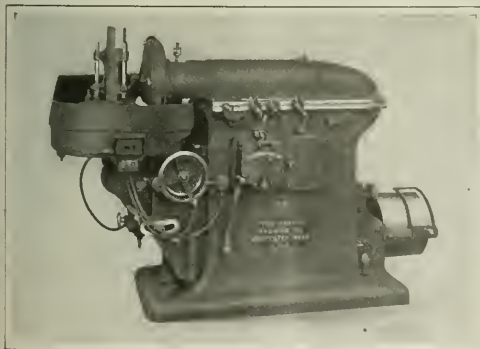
Automatic Surface Grinding Machine developed by the Heald Machine Co.
